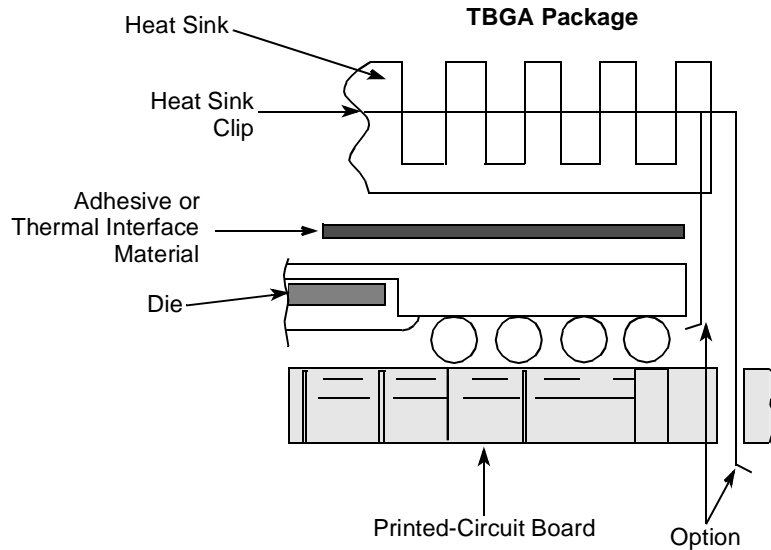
Package-Exploded Cross-Sectional View with Several Heat Sink Options
